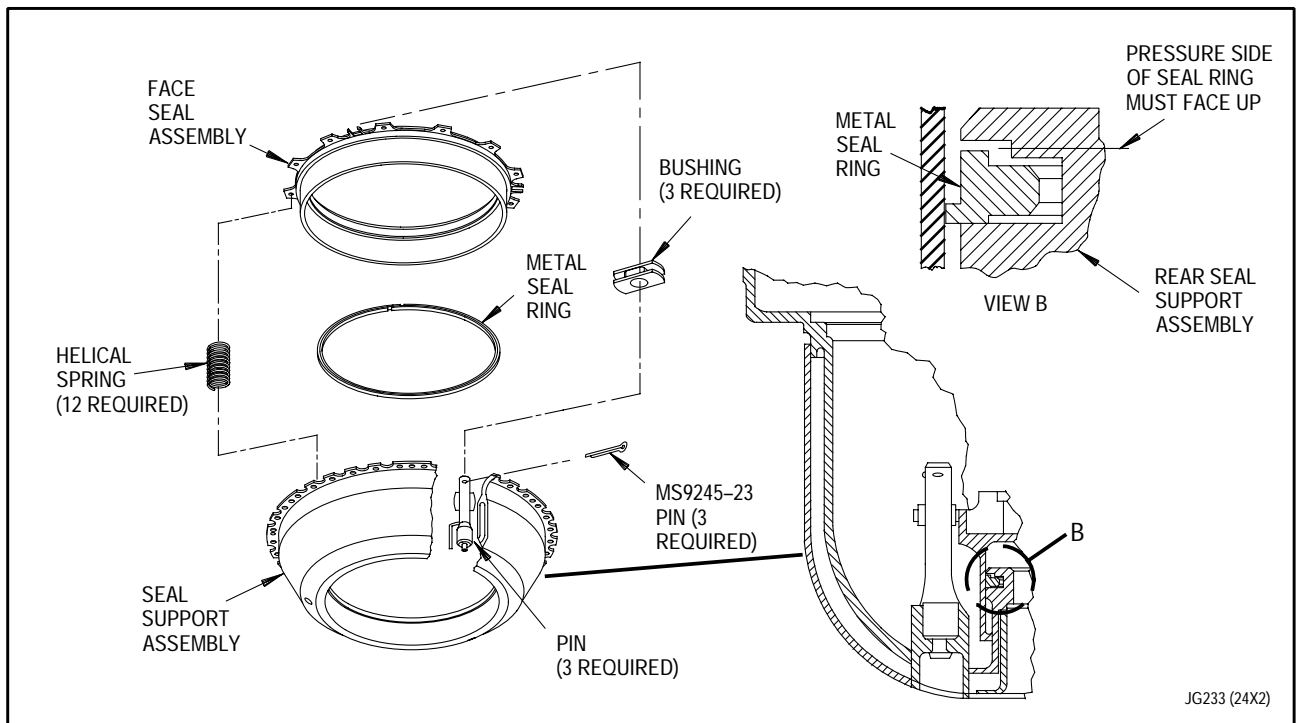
No. 4 Bearing Rear Seal Assembly - Assembly
